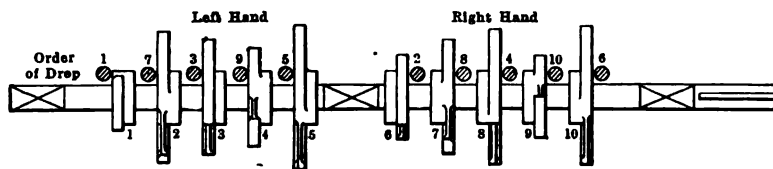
CAMS AND CAM-SHAFT FOR TEN-STAMP BATTERY.
